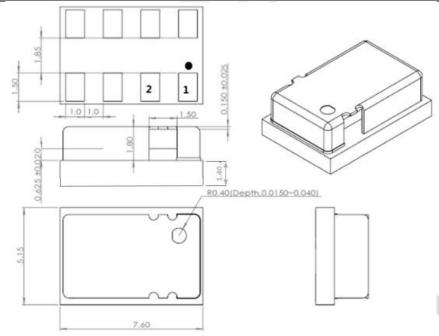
MFP257B1C\_2 Mechanical Drawing
